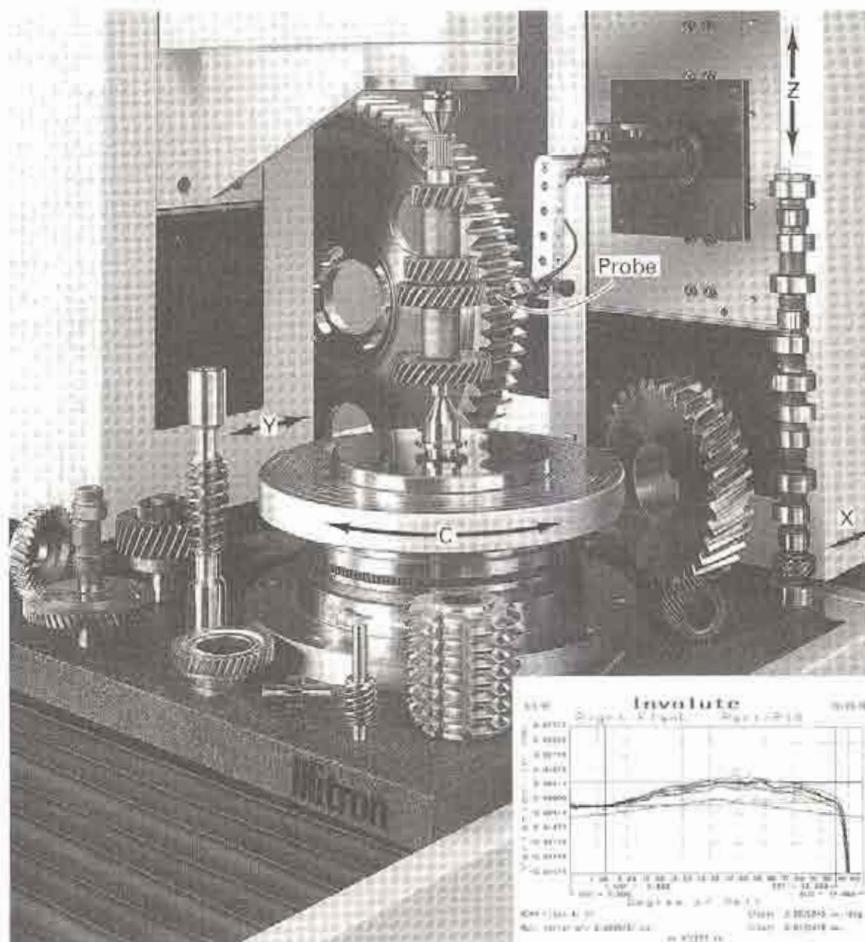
A CNC gear inspection machine has X, Y, Z motions plus a rotary table.
